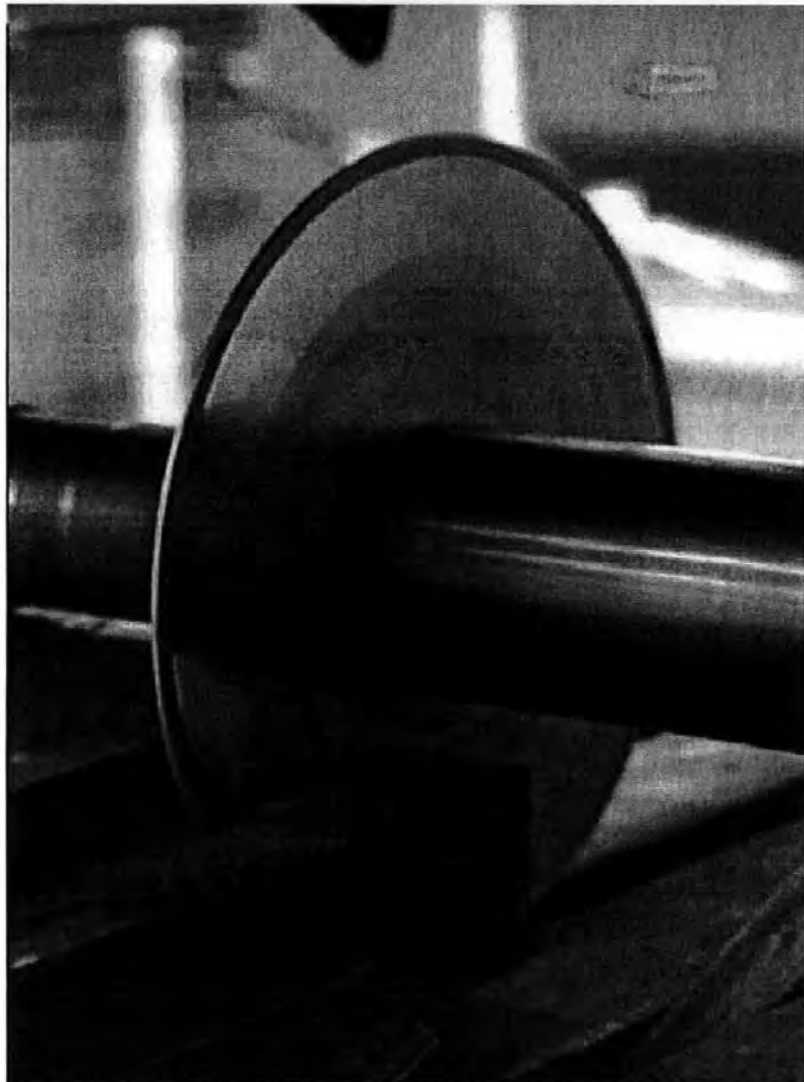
Cutting of tension / compression mechanical test coupons with Universal milling machine
